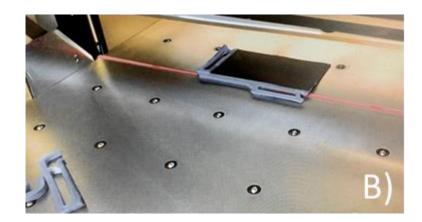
Details of MEA (GDL and gaskets). Cut off gaskets in the lower left corner
